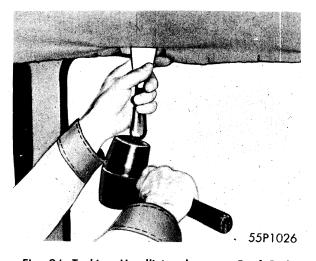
Tucking Headlining between Roof Rail and Retainer
